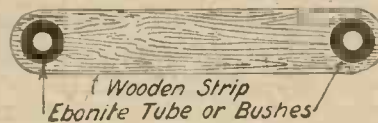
Ebonite inserts in a wooden strip form a useful insulator. Three-ply wood may be used.
